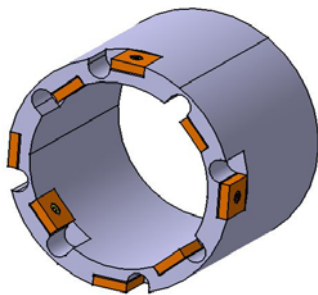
Reamer with tangential inserts clamped on the cylindrical face.
